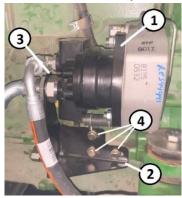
Pump Support Installation Key 1 – Pump Key 2 – Support Key 3 – Bulkhead Fitting Key 4 – M12 Bolts
